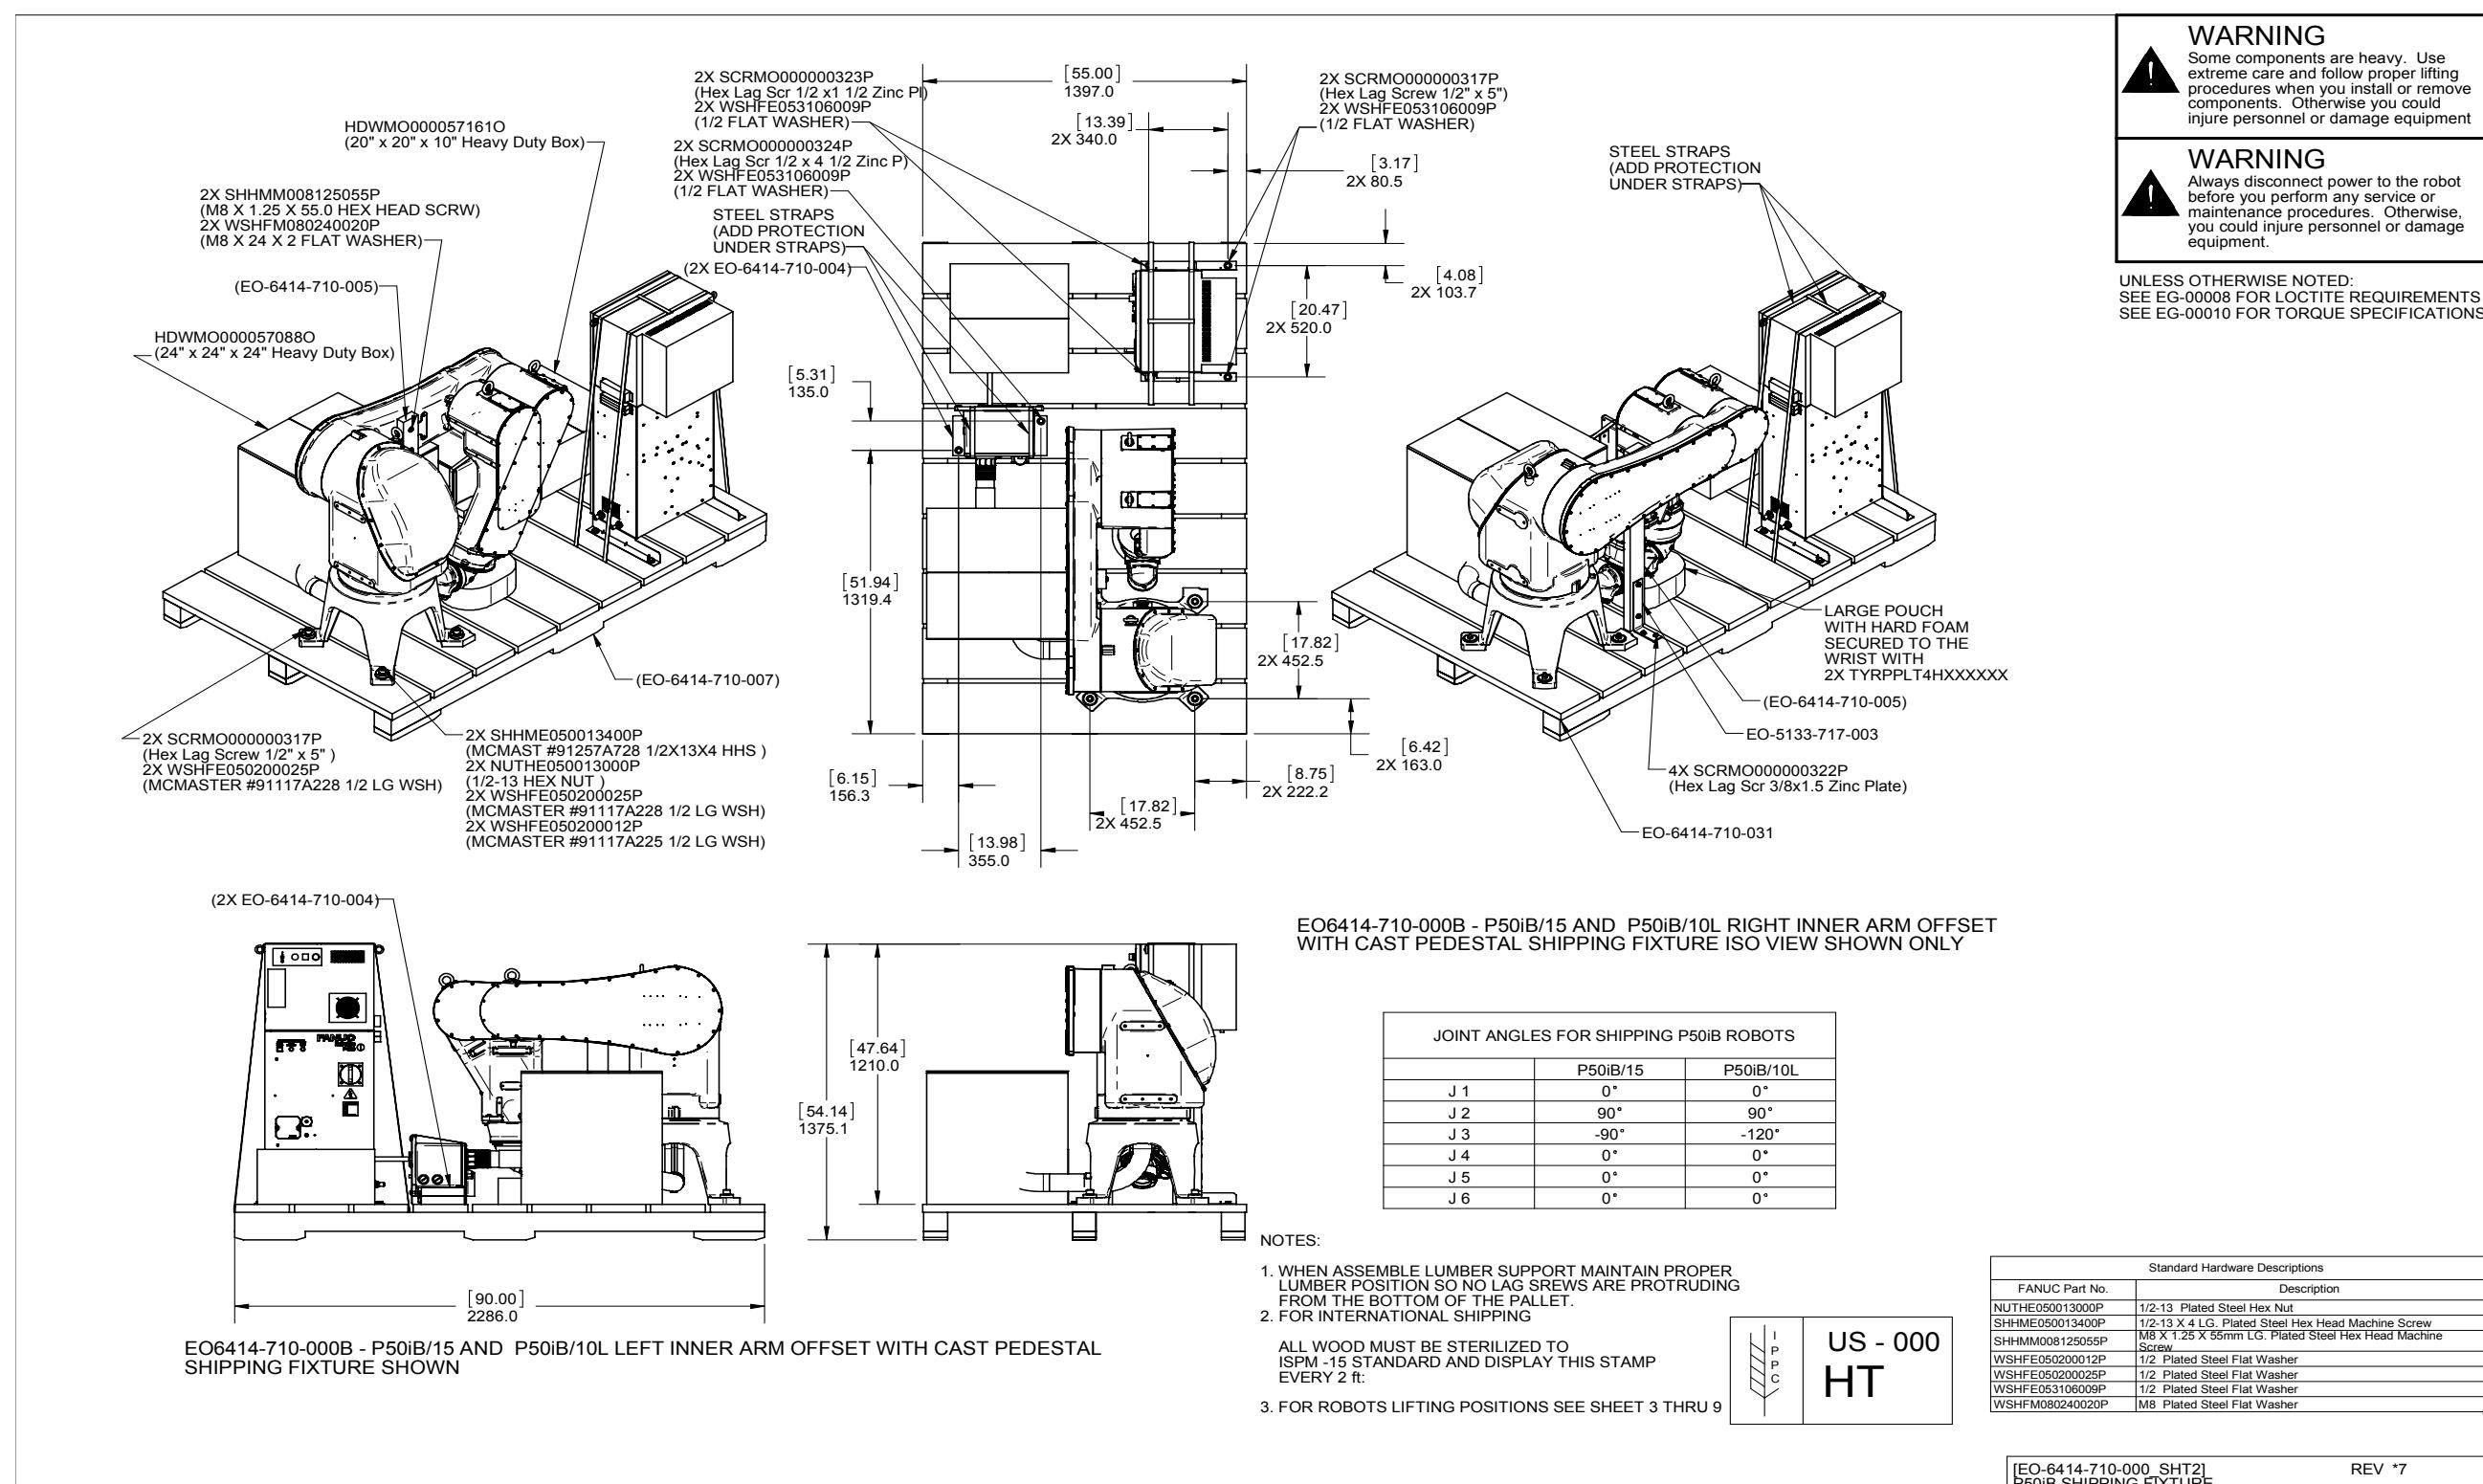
EO-6414-710-000 SHT2, P50iB SHIPPING FIXTURE
